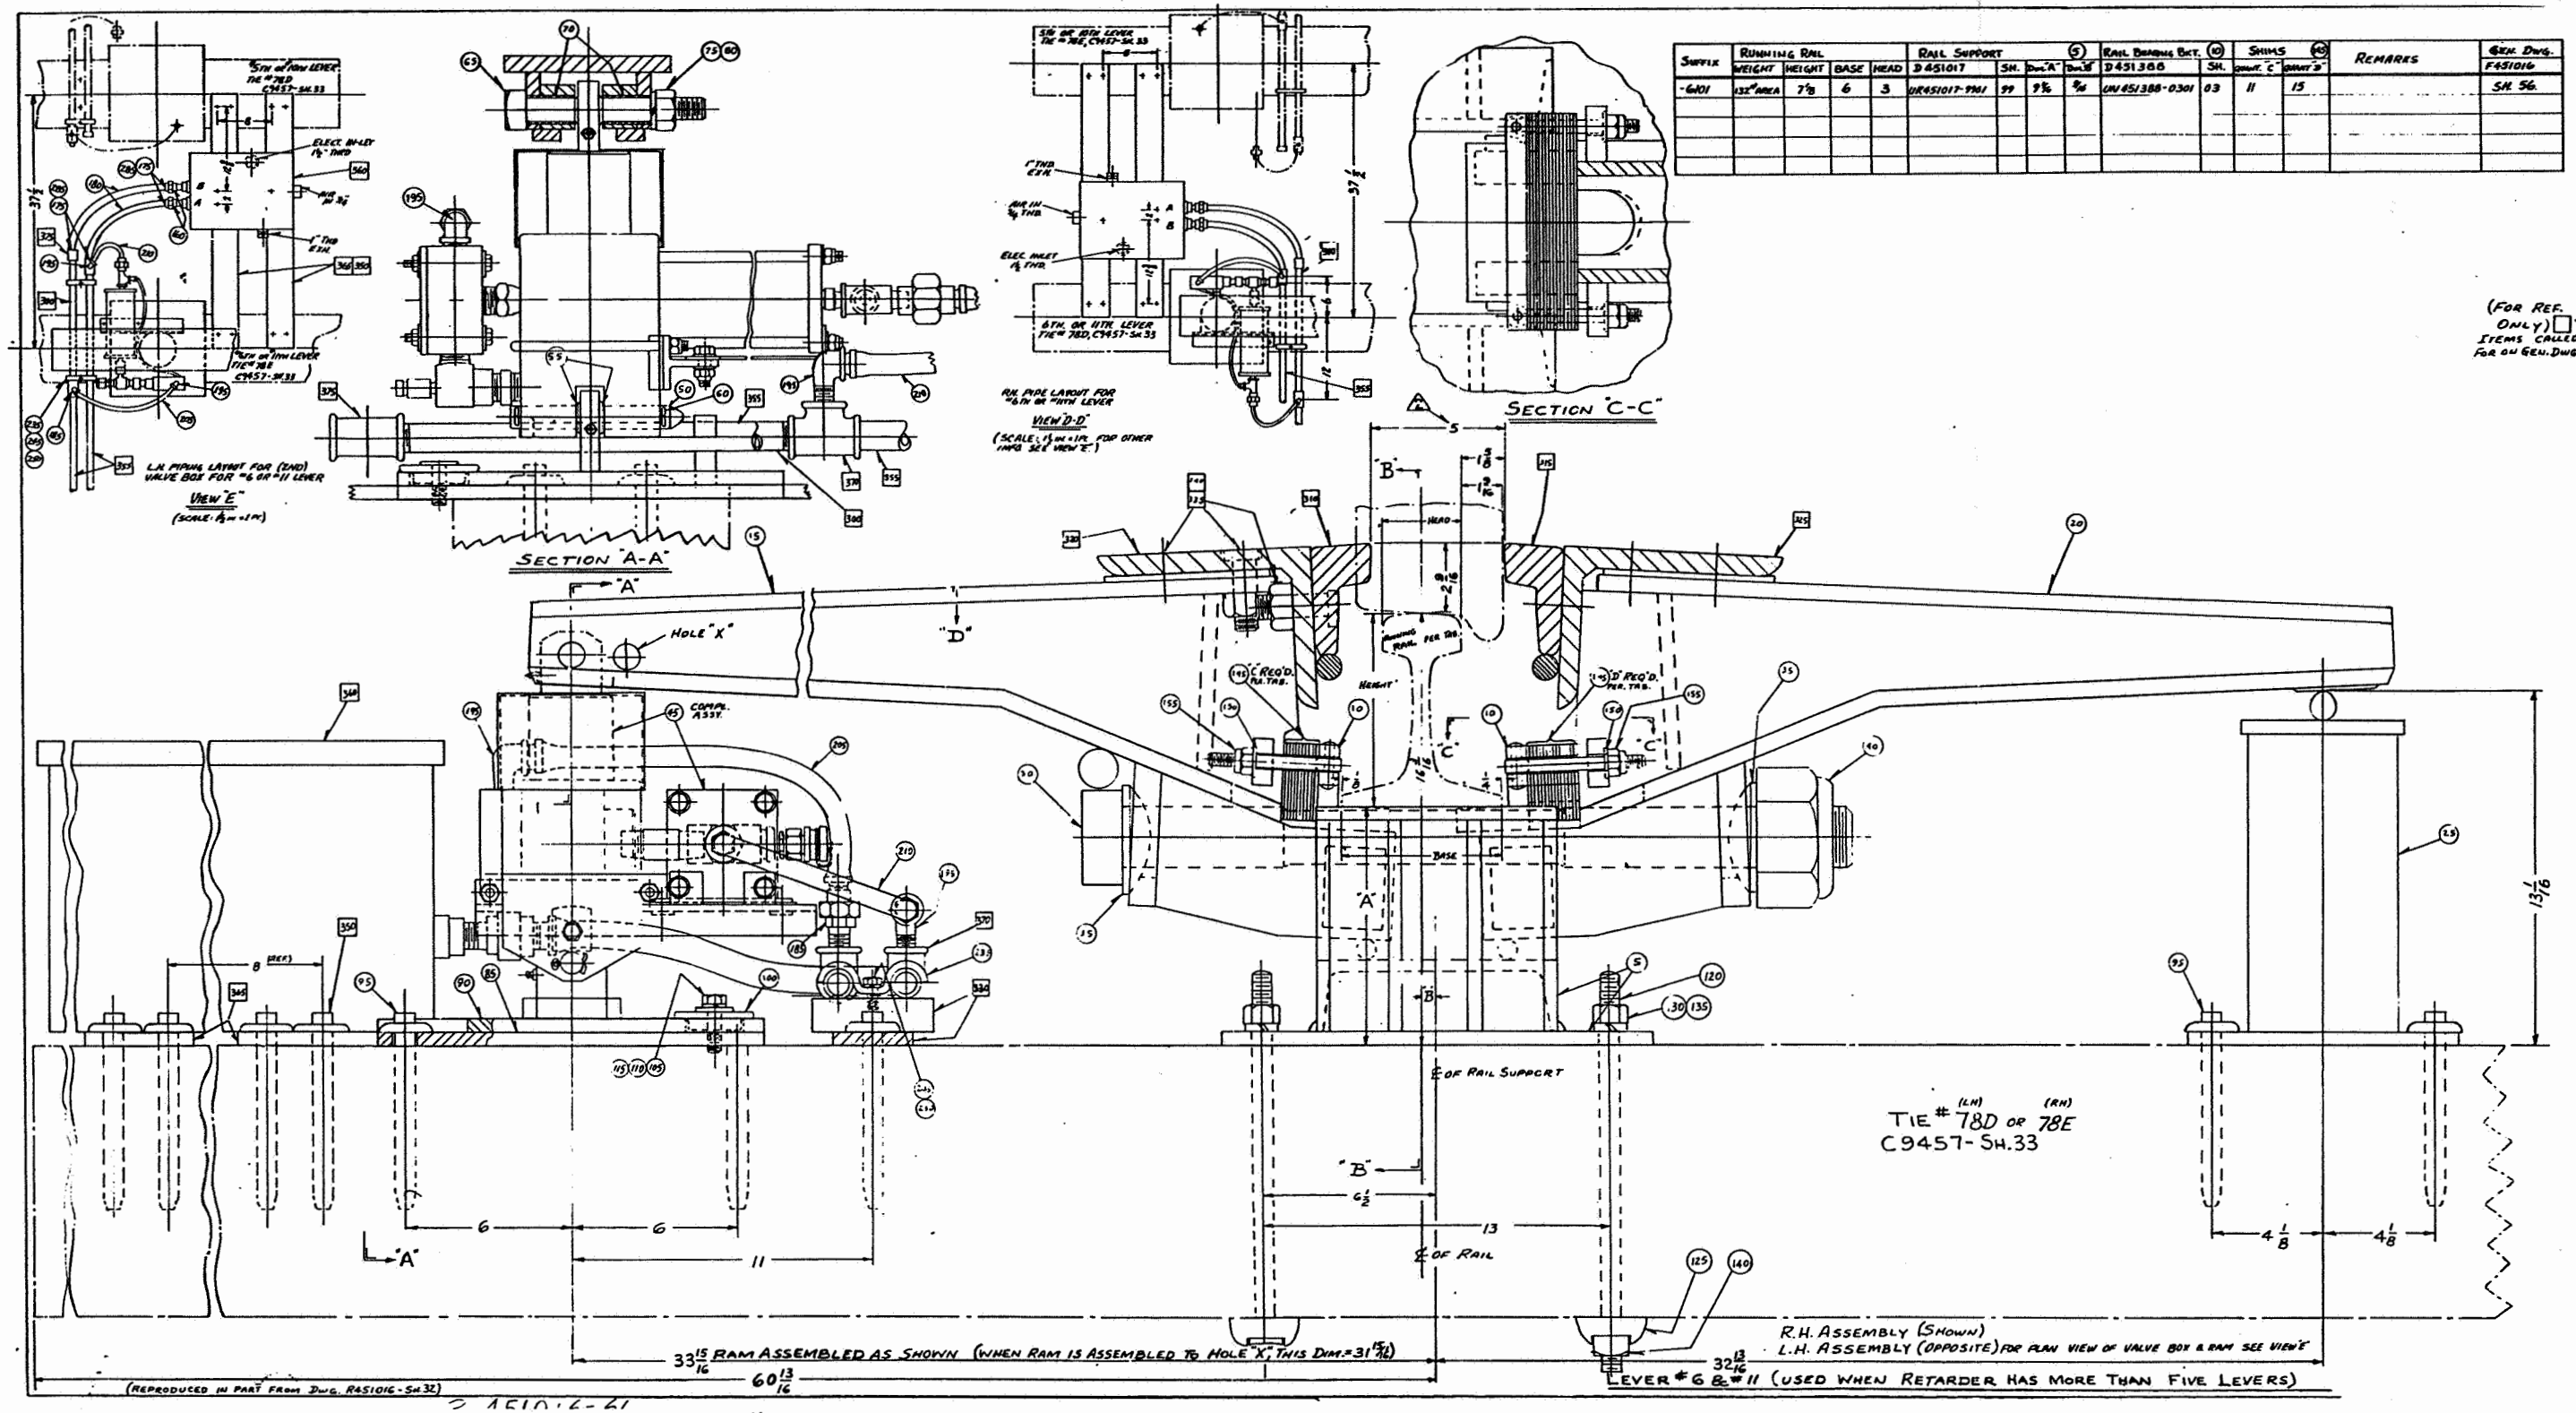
LEVER #6 ASSEMBLY, LOCATORS
